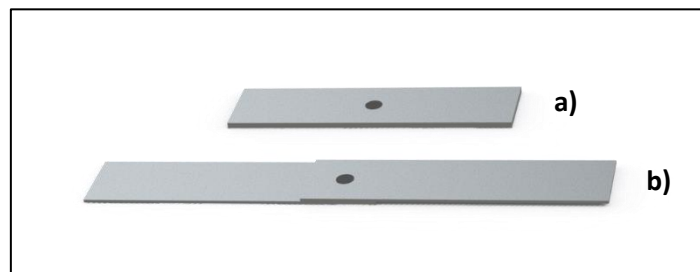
Weld samples, a) chisel sample, two or more sheets stacked directly on top of one another, b) tensile-shear sample, two partially overlapping sheets with a weld in the middle, allowing each sheet to be held individually for tensile shear testing.
